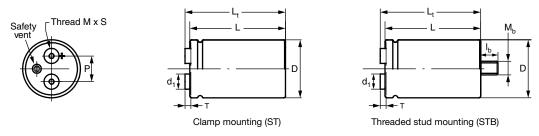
B - High current M6-18 mm disc and 1/4-28 UNF disc: Screw Terminal (ST) and Screw Terminal Bolt nut (STB) For details refer to Table 1
